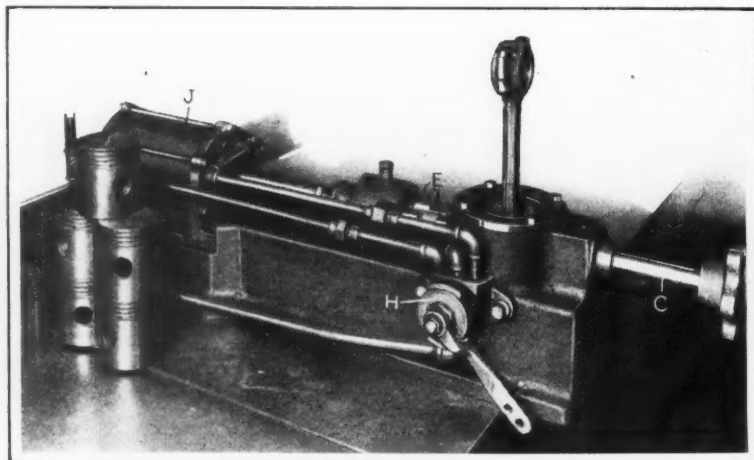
Pneumatic Equipment which has Effected a Large Saving in Time in Assembling Pistons, Piston-pins, and Connecting-rods
